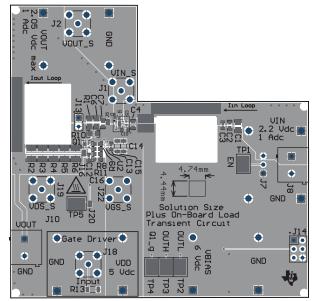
TPS7A14EVM-095 Bottom Assembly Layer and Silk Screen
